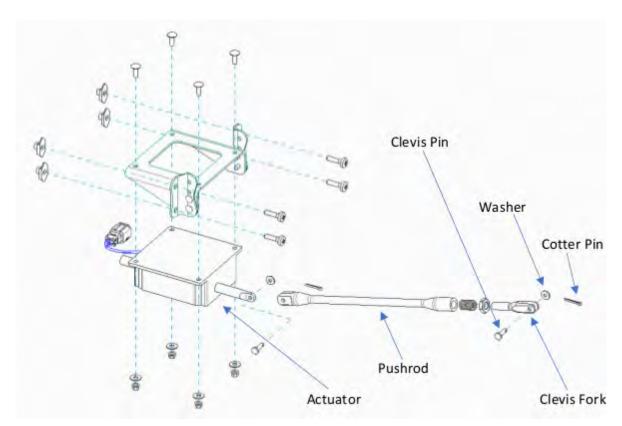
PITCH TRIM ACTUATOR ASSEMBLY
